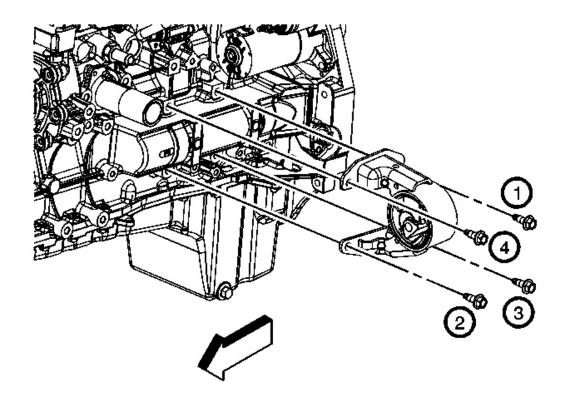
View Of Engine Mount Courtesy of GENERAL MOTORS CORP.
